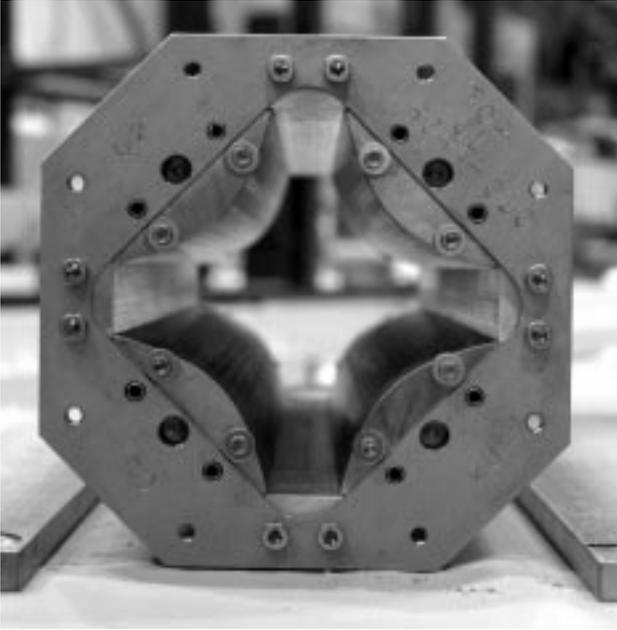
Photo of end of quadrupole pole assembly. Stainless end collar, aluminum pole spacers and iron poles with 12-pole tuning washers in place are visible.
